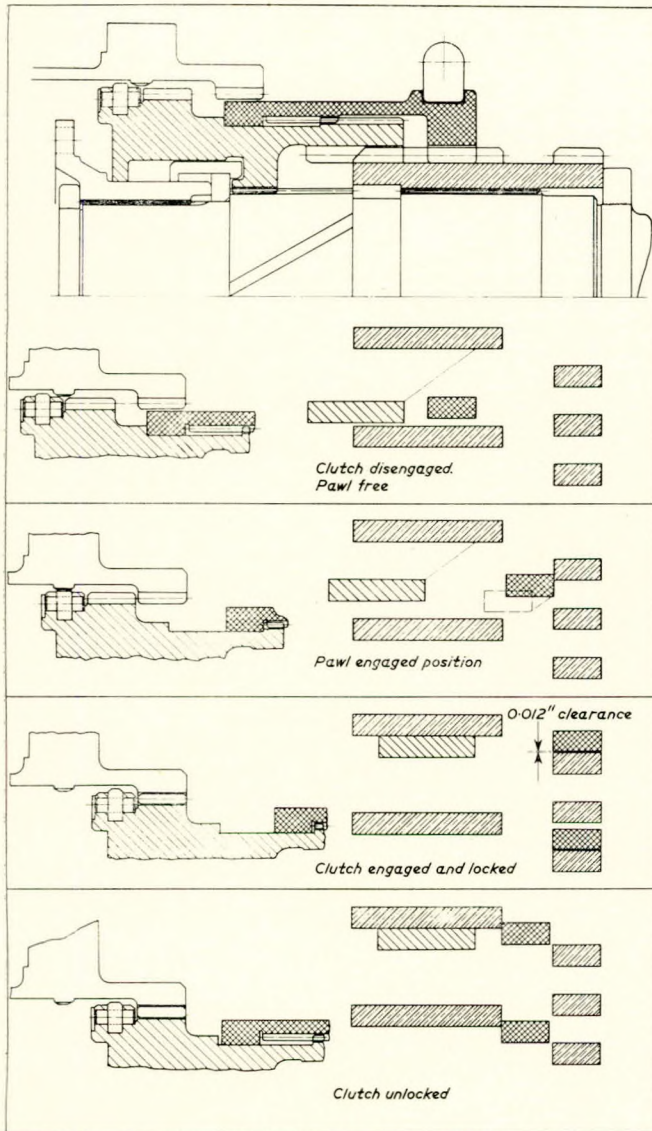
Y.102A. Assembly of main synchronizing clutch—Port. Positions of various parts during engagement and disengagement
